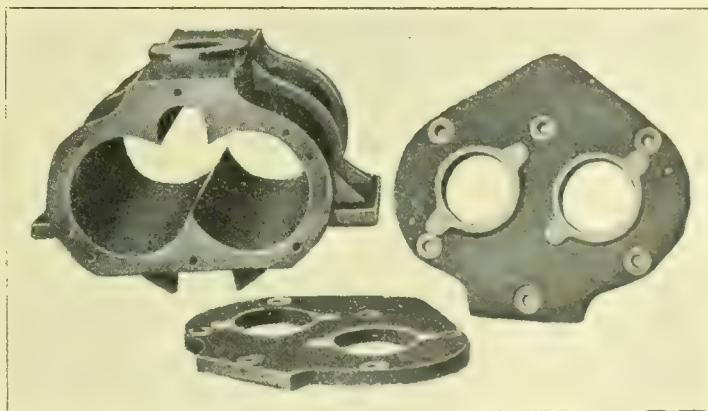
"SPIRO" ENGINE CYLINDER AND CYLINDER HEADS.
